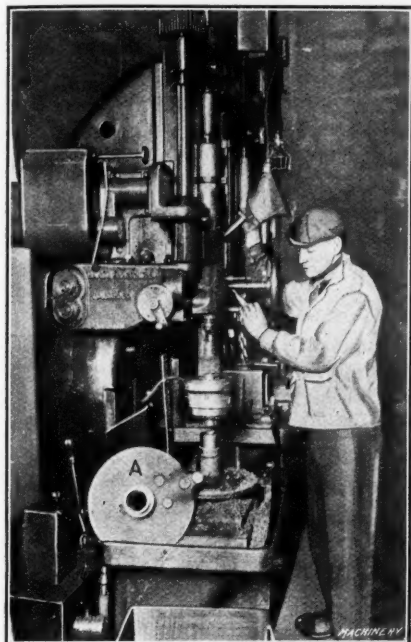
Hollow-milling Hub End of Brake Support in Baker Drilling Machine
